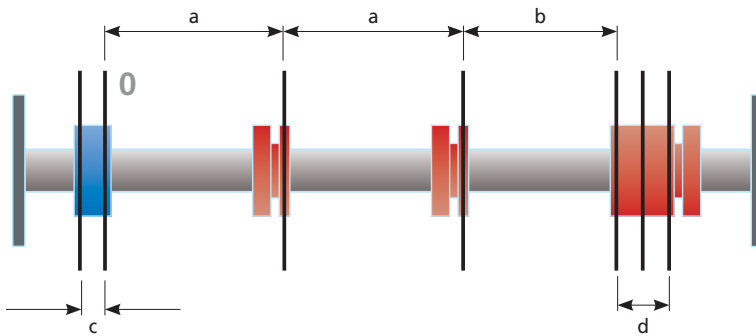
Movable saw configuration with one fixed and three movable saw bushes
